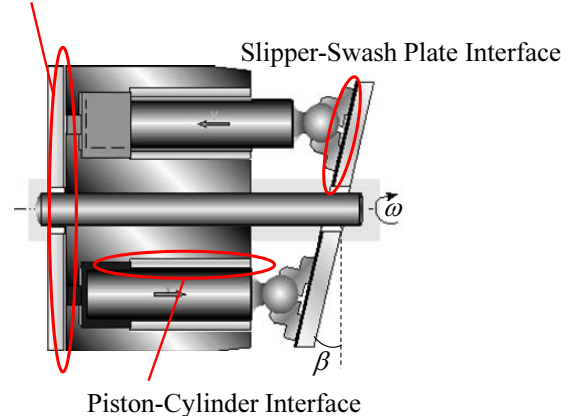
Cross section of an axial piston machine of swash plate design illustrating the three lubricating gaps
